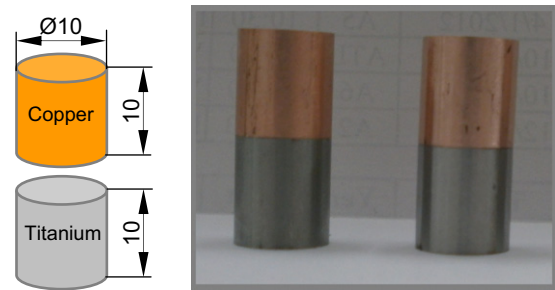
Photographs and dimensions of *t* welded specimens.
